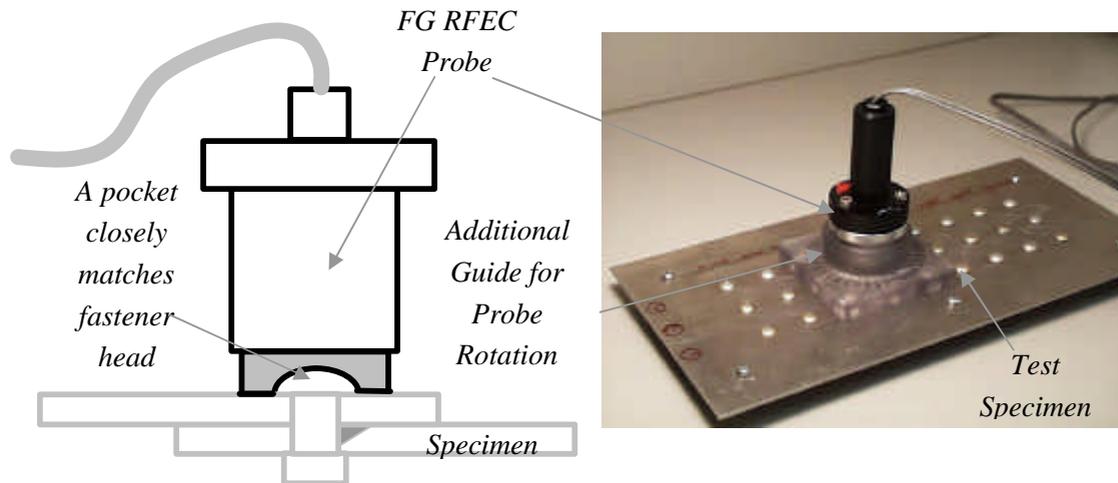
Rotational FG RFEC probe applied to raised-head fastener
